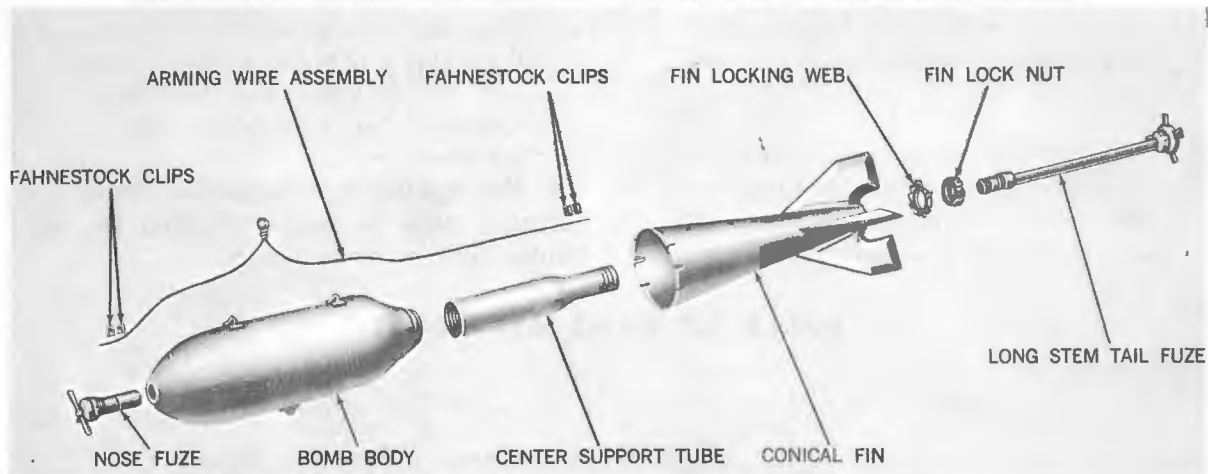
250-lb GP Bomb AN-M57A1 with Fin Assembly M126, Exploded View.
